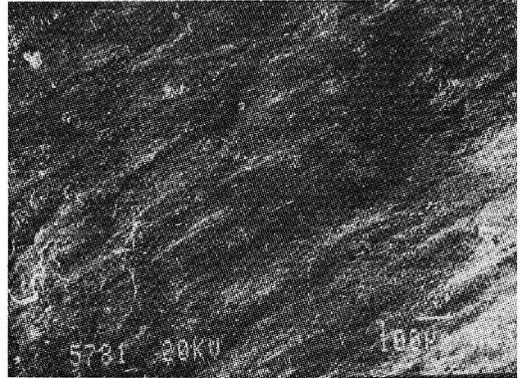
Slow growth zone of fatigue fracture
